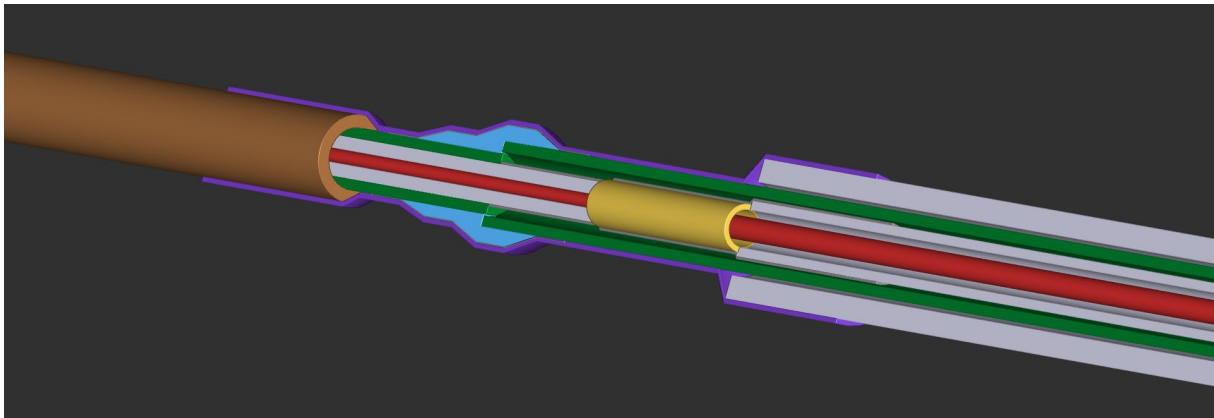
First part of the Langmuir probe. Tungsten and copper wires in red, Millmax 3061 in yellow, screens in green, alumina tubing and cable inner insulator in white, soldering in light blue.
